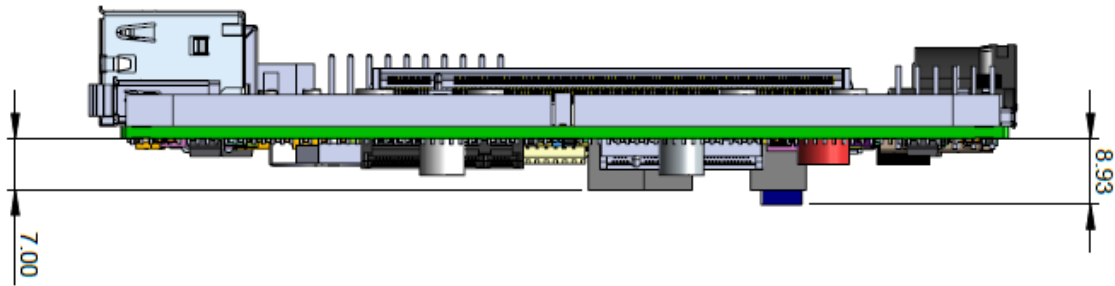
i.MX 8M Mini or i.MX 8M Nano Qseven Carrier board Mechanical dimension – Bottom Max Heighted Components
